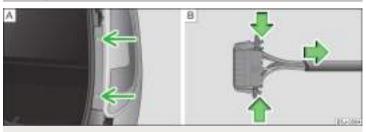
Removing the tail light assembly/disconnecting the plug connection
